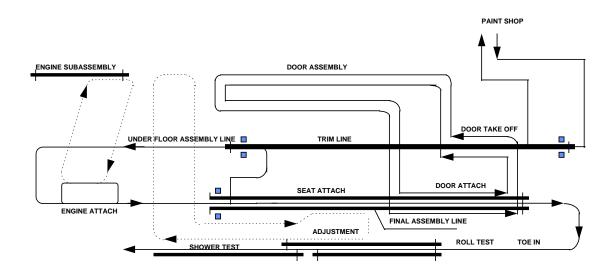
A Typical Layout of Trim and Final Assembly
